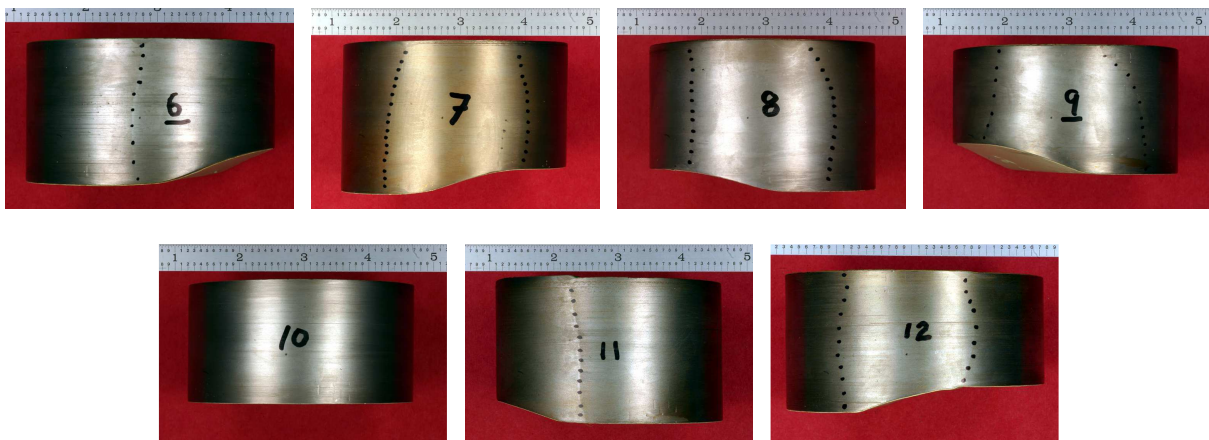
Photographs of core samples with approximate weld location marked as dotted lines [Courtesy of MEI Charlton, Inc.].
